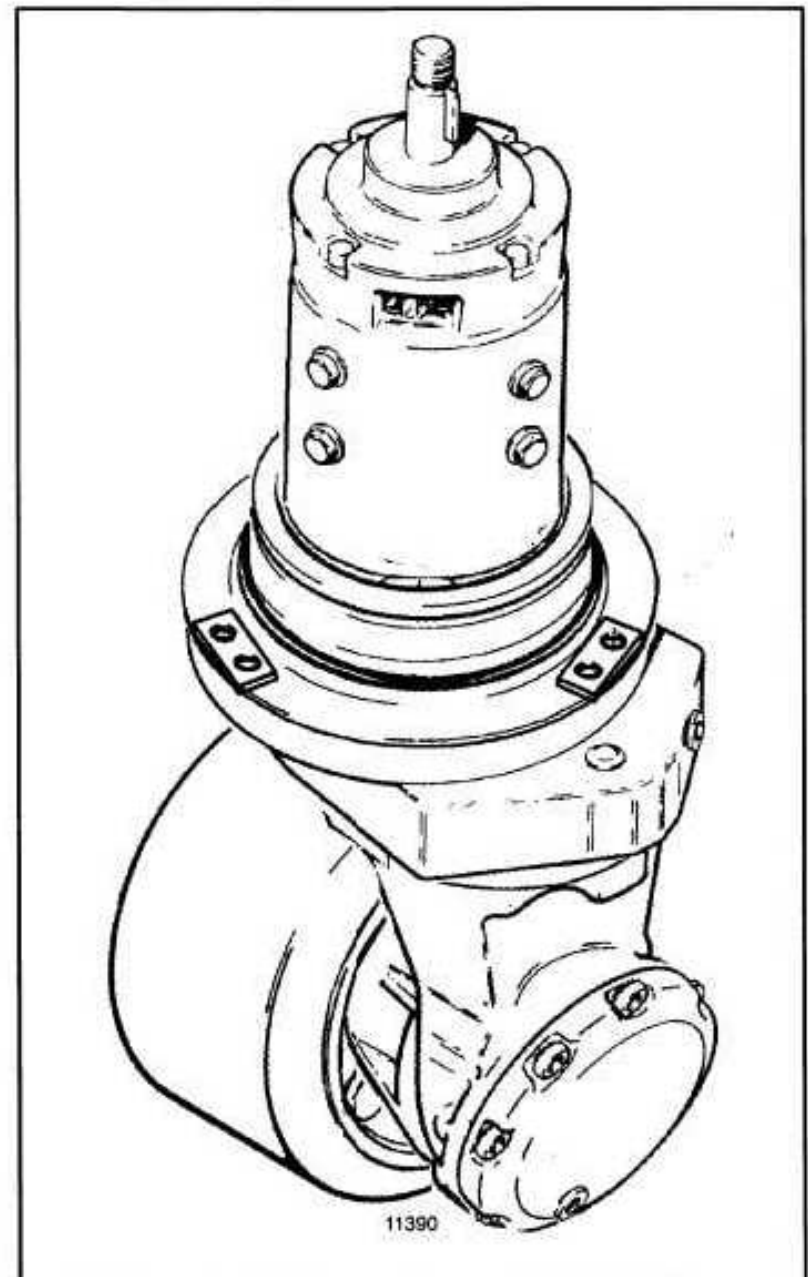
Master Drive Unit with Wheel and Traction Motor
